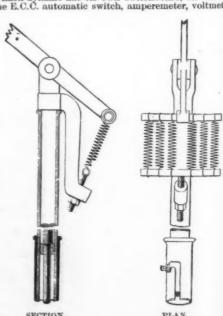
DETAILS OF TROLLEY-SHOWING TROLLEY WHEEL
